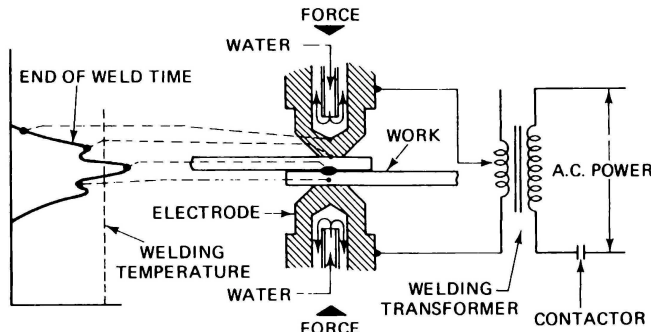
Schematic description of the resistance spot welding technique (Cary, 1994).
